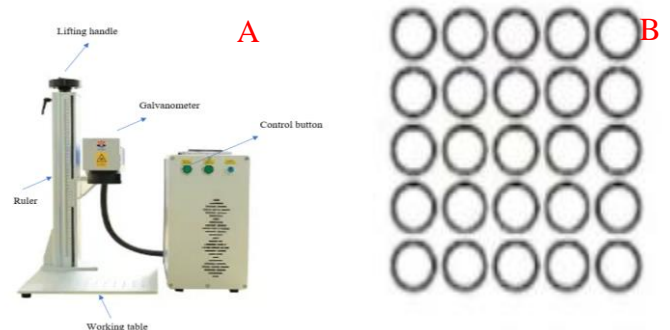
Laser Marking; (A) Laser marking machine, (B) single circle grids
